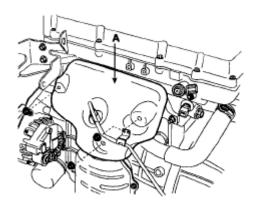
Identifying Exhaust Manifold & Catalytic Converter Assembly Courtesy of HYUNDAI MOTOR CO.
